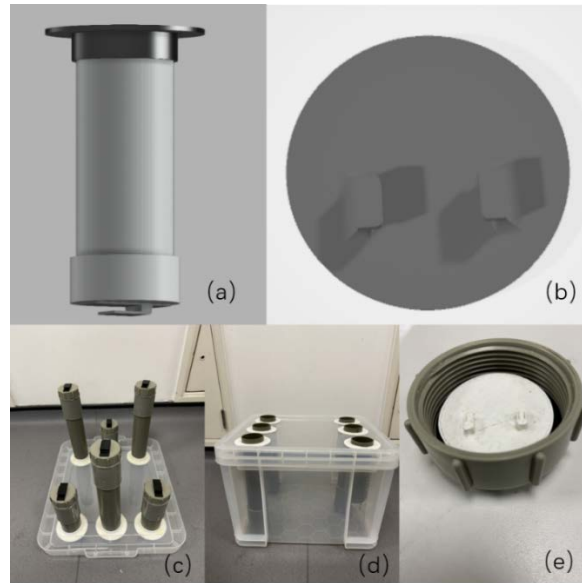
Patch holder and container assembly final version: (a & b) electrical patch and sensor holder; (c, d & e) container with six holders
